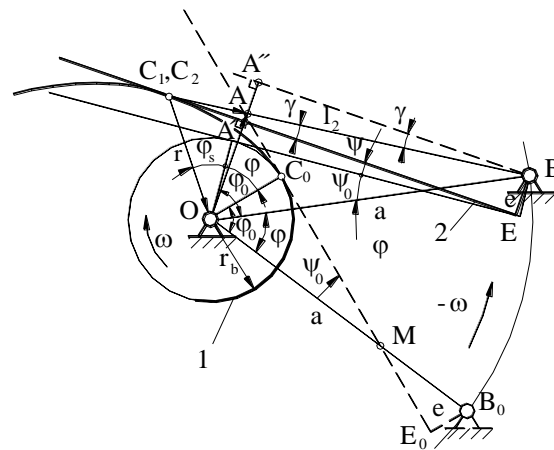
Cam mechanism with eccentric oscillating flat-face follower
